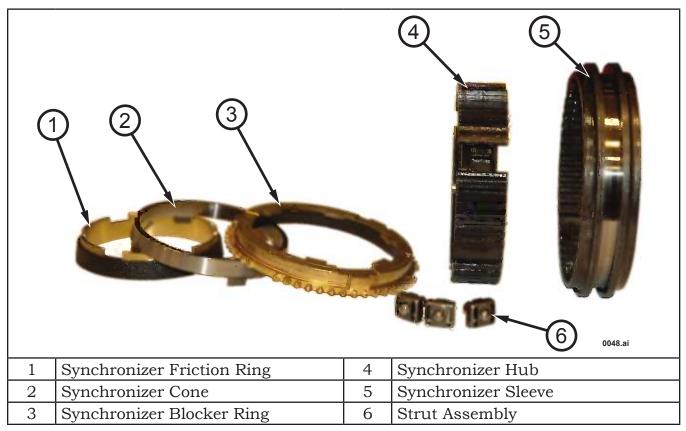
DMT6 Double Cone Synchronizer Exploded View
